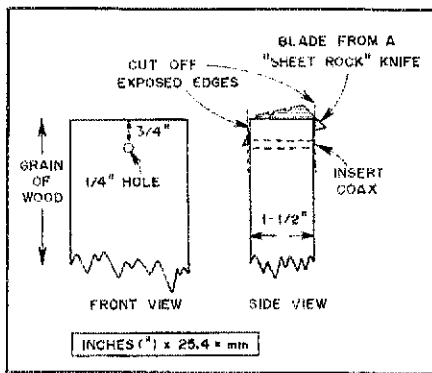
Construction details of a jig for stripping the outer insulation from large amounts of coaxial cable. [Exposed edges of the blade could be cut or ground off as a safety measure — Ed.]
